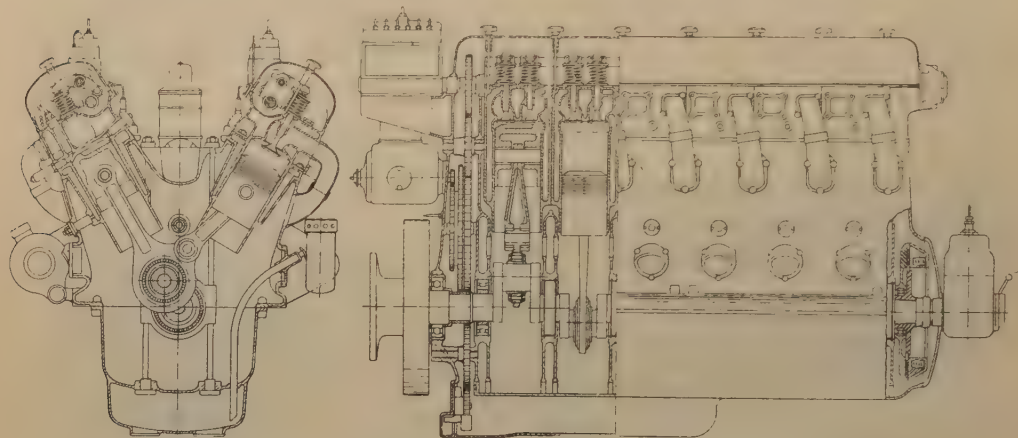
Sectional elevation of the new Maybach Diesel engine.
